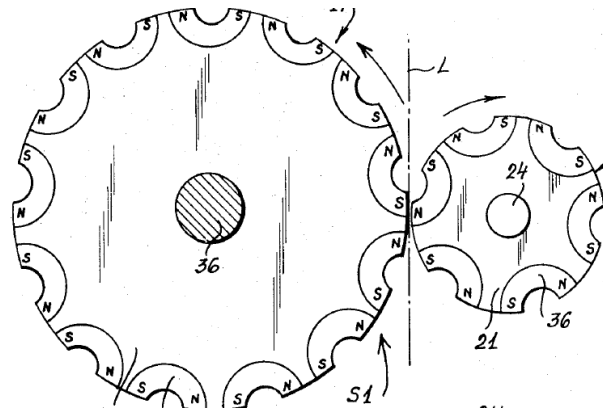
Spur-Type Magnetic Gear with U-Magnets (9)
